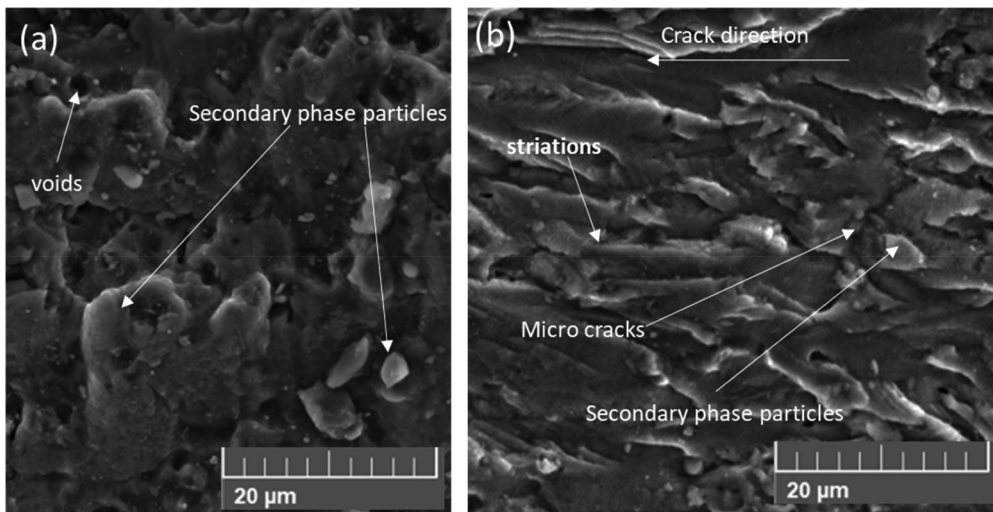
Fatigue crack initiation morphology of Al alloy 7075-T7, (a) countersunk rivet hole, (b) perpendicular rivet hole.
